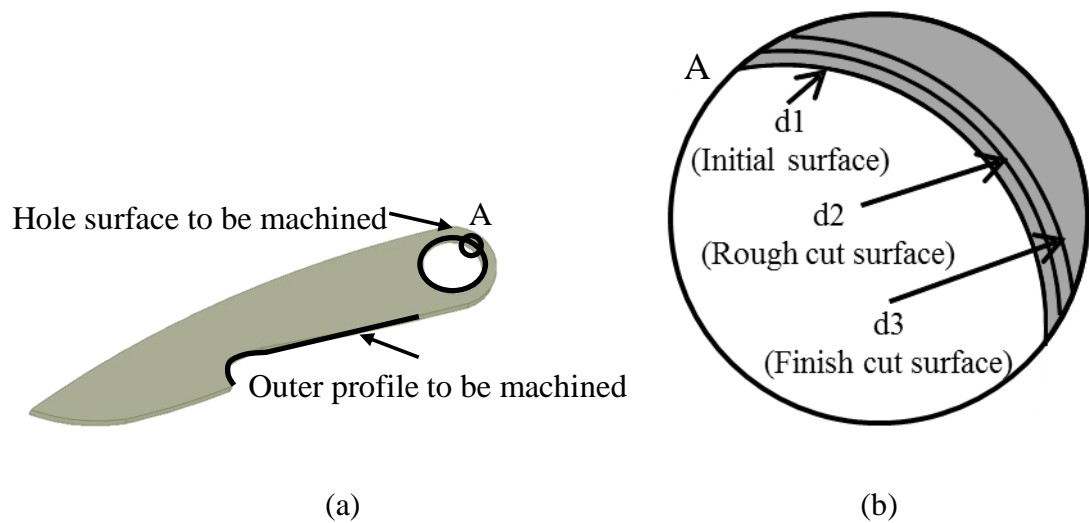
Knife X (a) hole surface and outer profile to be machined and (b) respective hole diameters.
